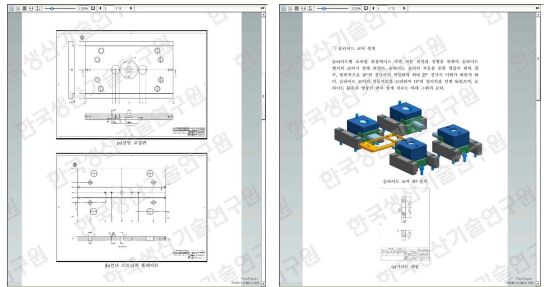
Standard drawings of injection mold for slide-type mobile phone case
